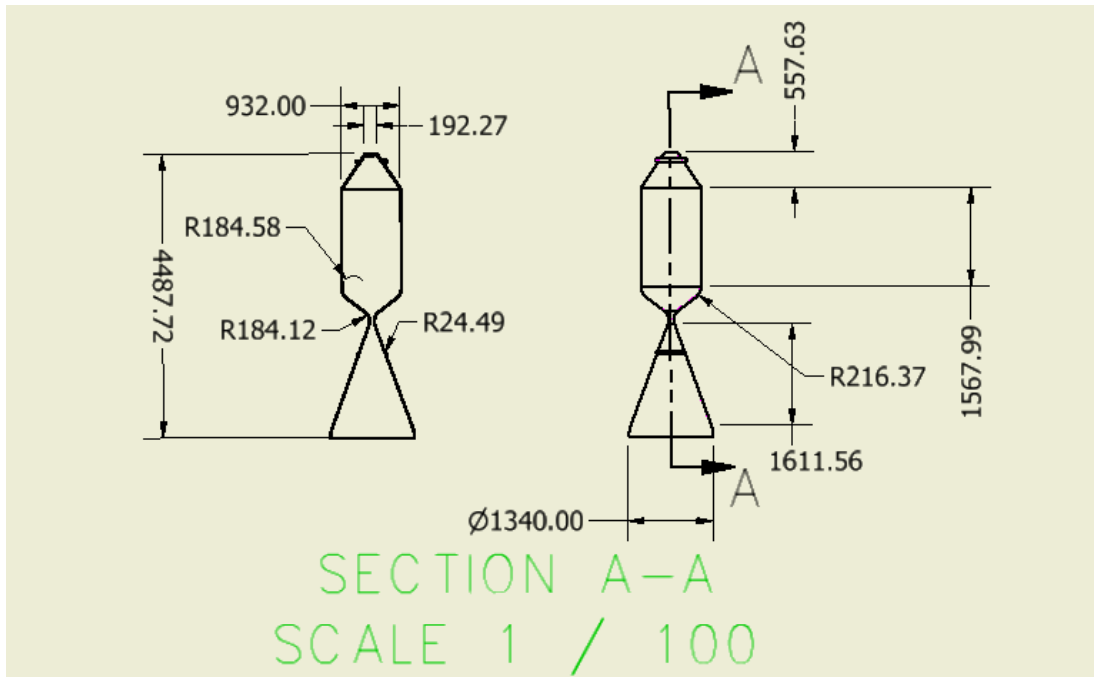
Full Dimensioned Drawing of SNRE (mm)
